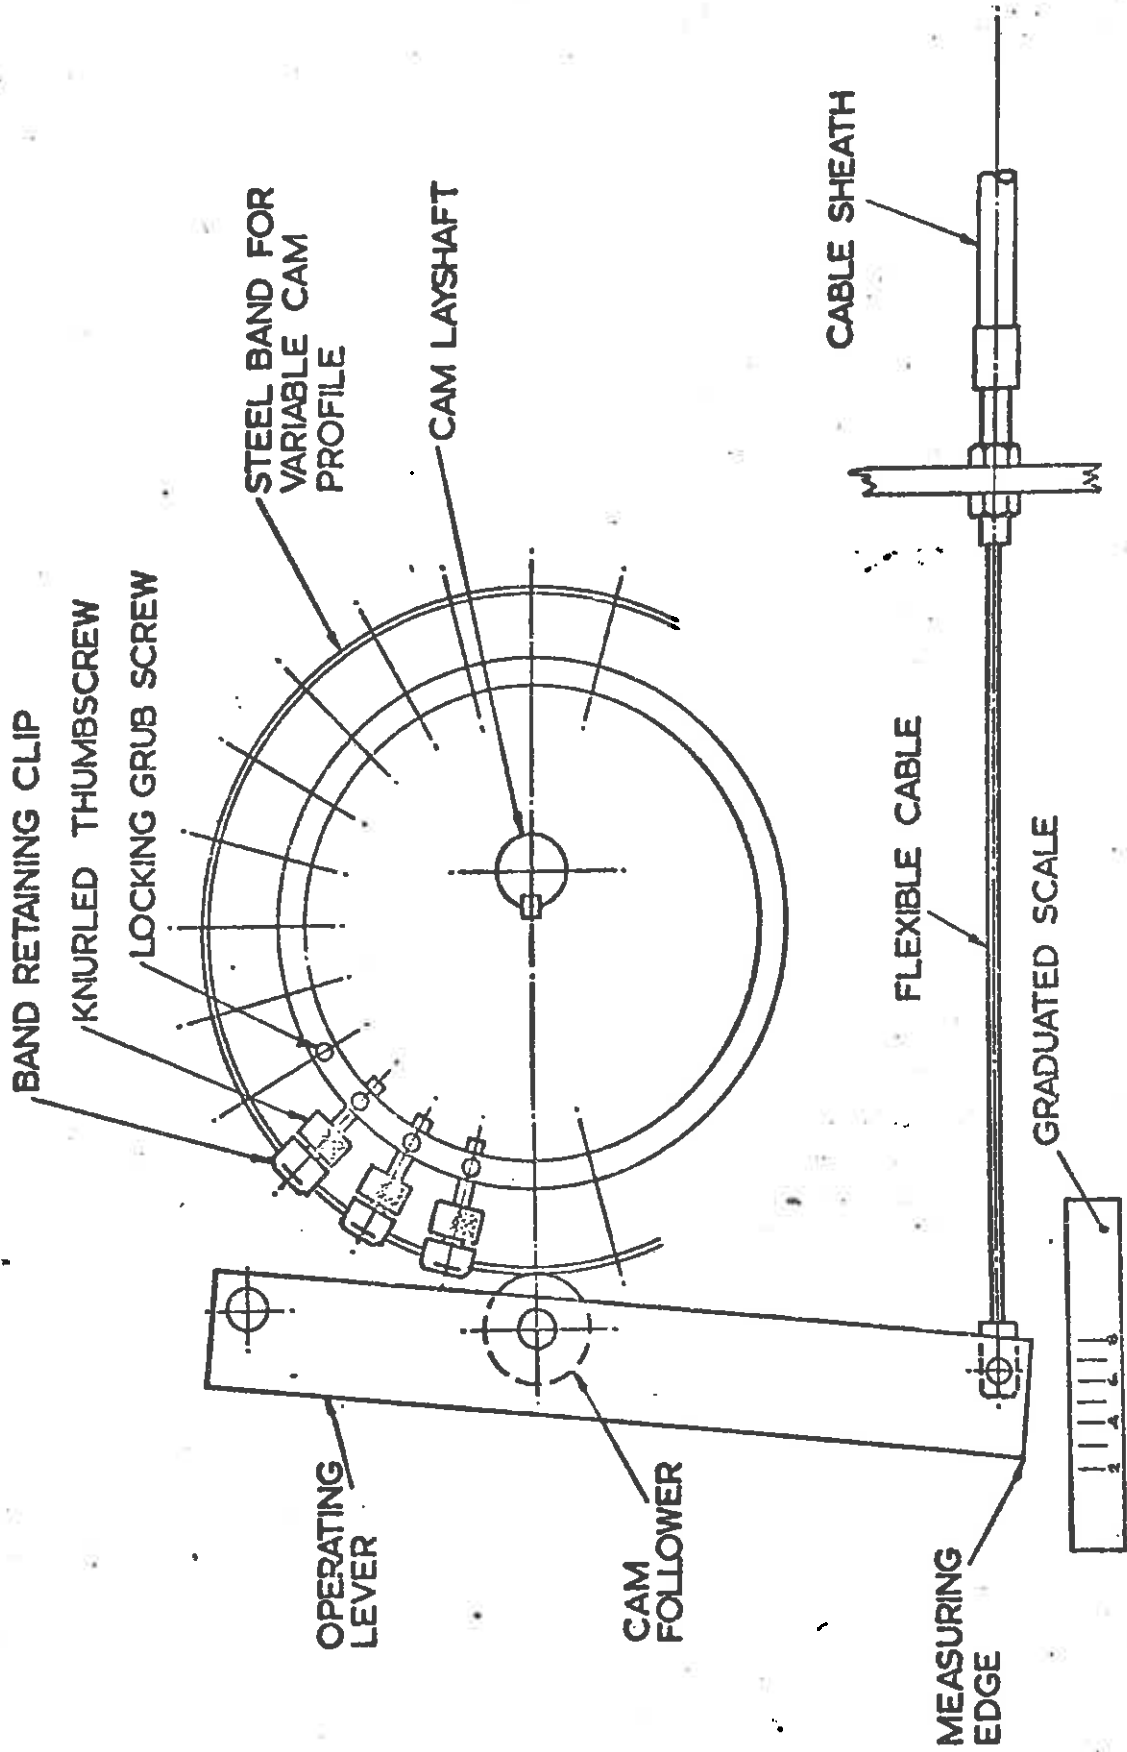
A DETAIL OF MODULATING AIR OR GAS CAM MECHANISM
